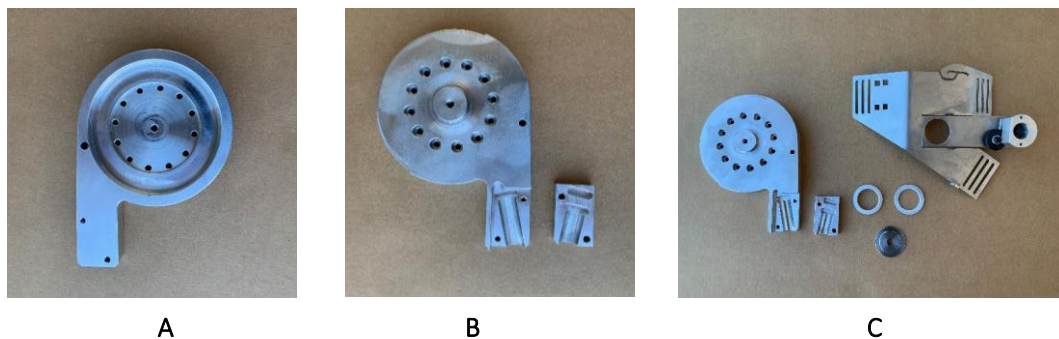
Flange for the connection with leg pad from front (A) and behind (B) view, made in Aluminium 6082. Thigh flange, pelvis belt, washers and spacer (C).
